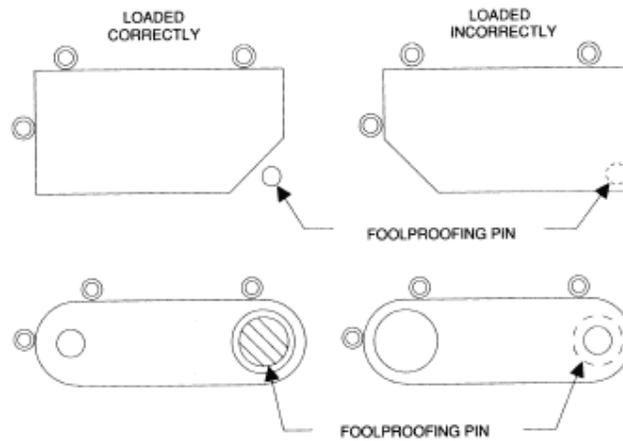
Foolproofing the location prevents improper workpiece loading.
